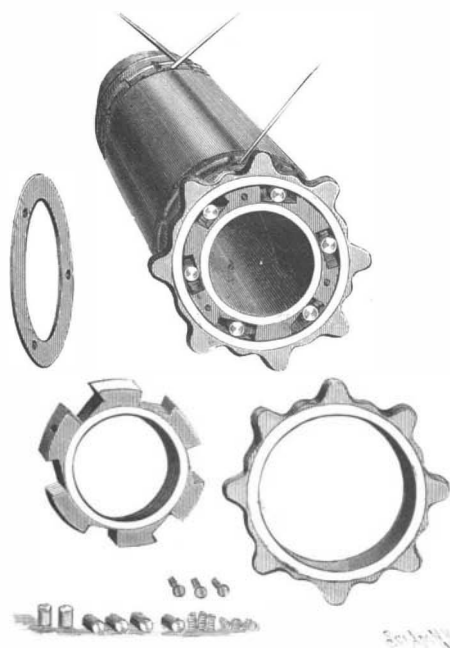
THE MORROW HUB AND DETAILS OF SPROCKET CLUTCH.
